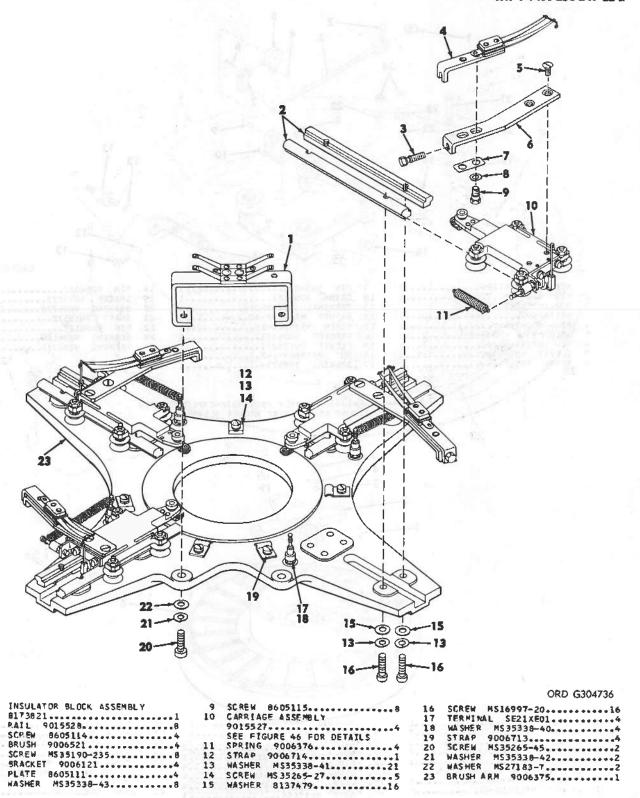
BRUSH ASSEMBLY /8173820/-EXPLODED VIEW /SEE FIGURE 39 FOR NEXT HIGHER ASSEMBLY/
